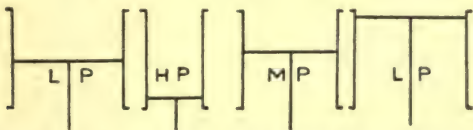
Cylinder arrangement of a four crank triple expansion engine.
